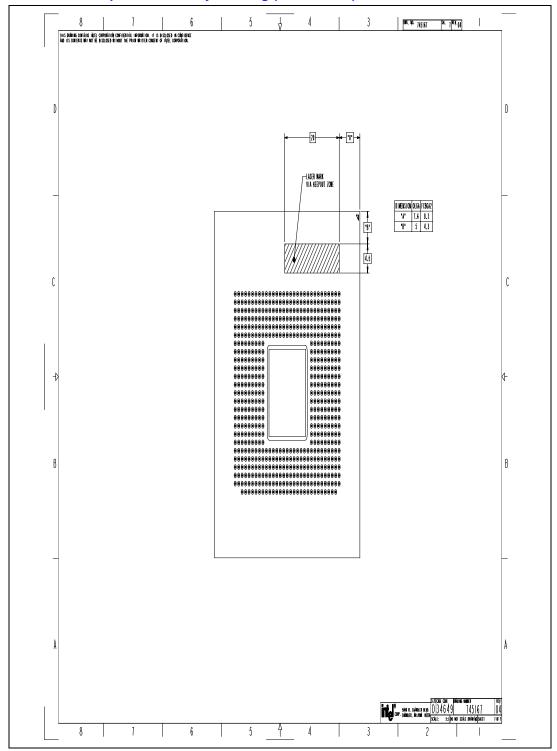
603-Pin Interposer Assembly Drawing (Sheet 7 of 7)
